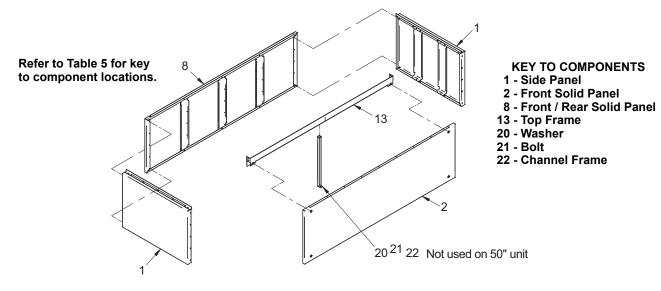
Grilled plenum, front discharge—50", 74" (1270mm, 1880mm) unit length
